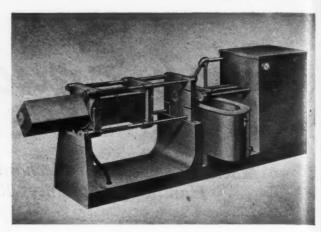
Harvill Die-casting Machine Equipped for Air Injection and Manual Opening of Dies
